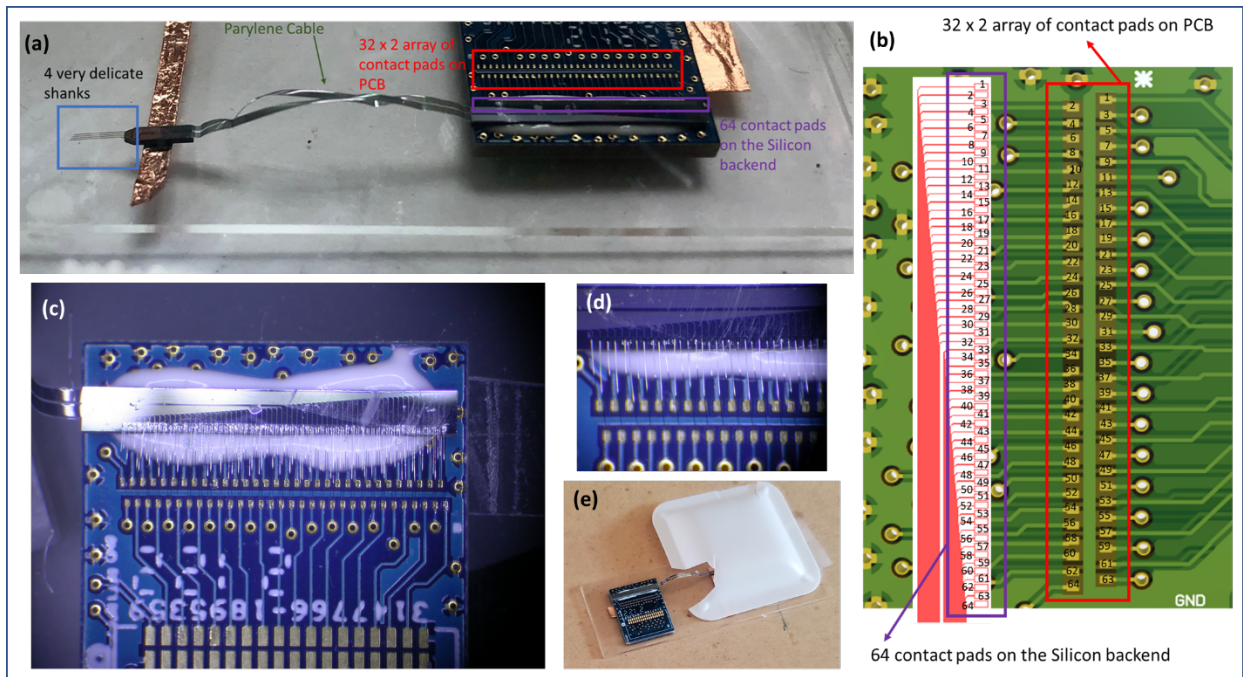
Wire bonding and packaging process for preparing probes. (a) Overall view of a 4-shank probe packaged and wire-bonded to the PCB. (b) Layout of 64 pads on the backside of the integrated flexible cable and the PCB for wire bonding. (c, d) Zoomed-in views of the 0.7 mil Al wire bonds. (e) Use of a plastic cover to protect the delicate shanks during the wire bonding process.
